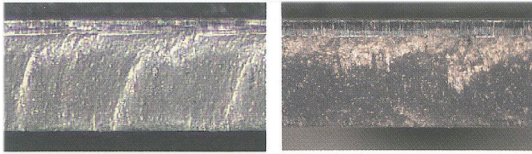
Sheet edge appearance for CR 1400T-MS, $t = 2\text{ mm}$ with different cutting conditions. The left image indicates that cutting clearance and/or shearing angle is too large. The right image indicates that the cutting conditions are OK.
